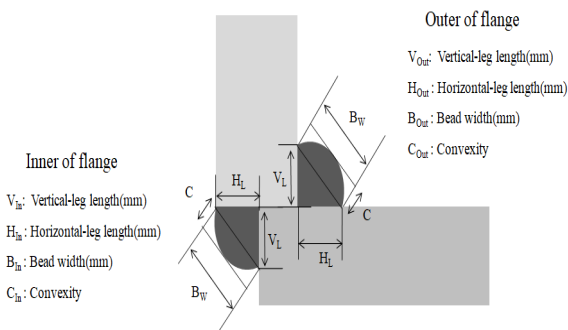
A schematic diagram of bead geometry for pipe-flange welding
